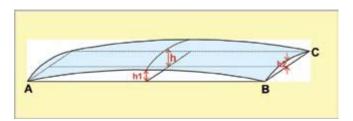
Duplex bending induced by peening one major surface of an Almen strip.
